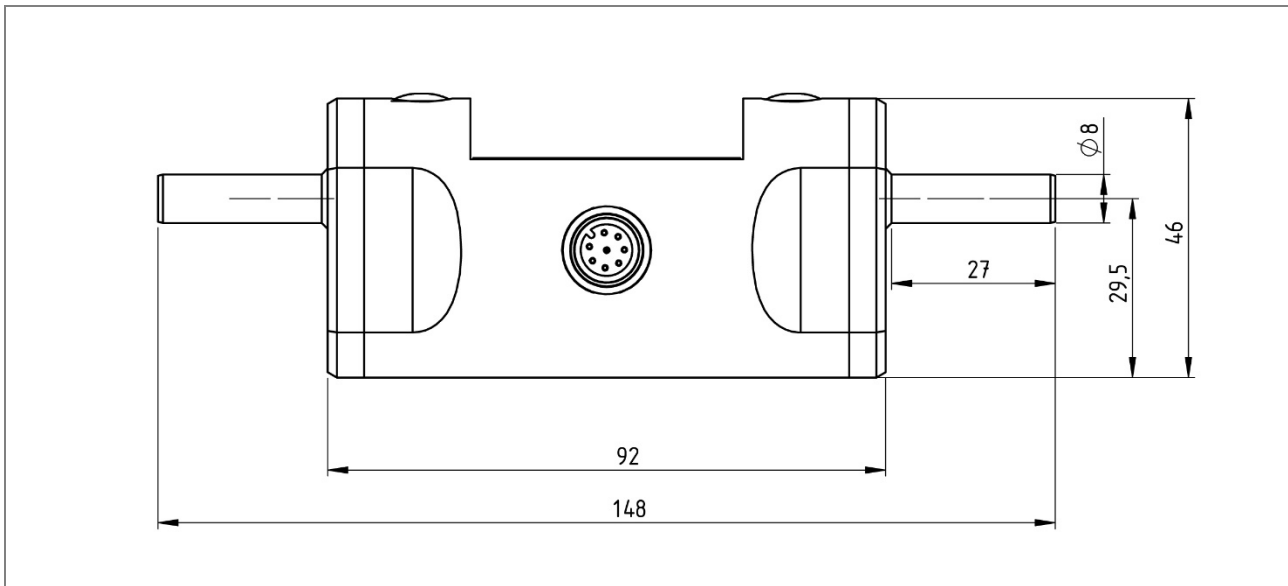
Dimensions SONOFLOW® IL.52/3 V2.0 – Side view
